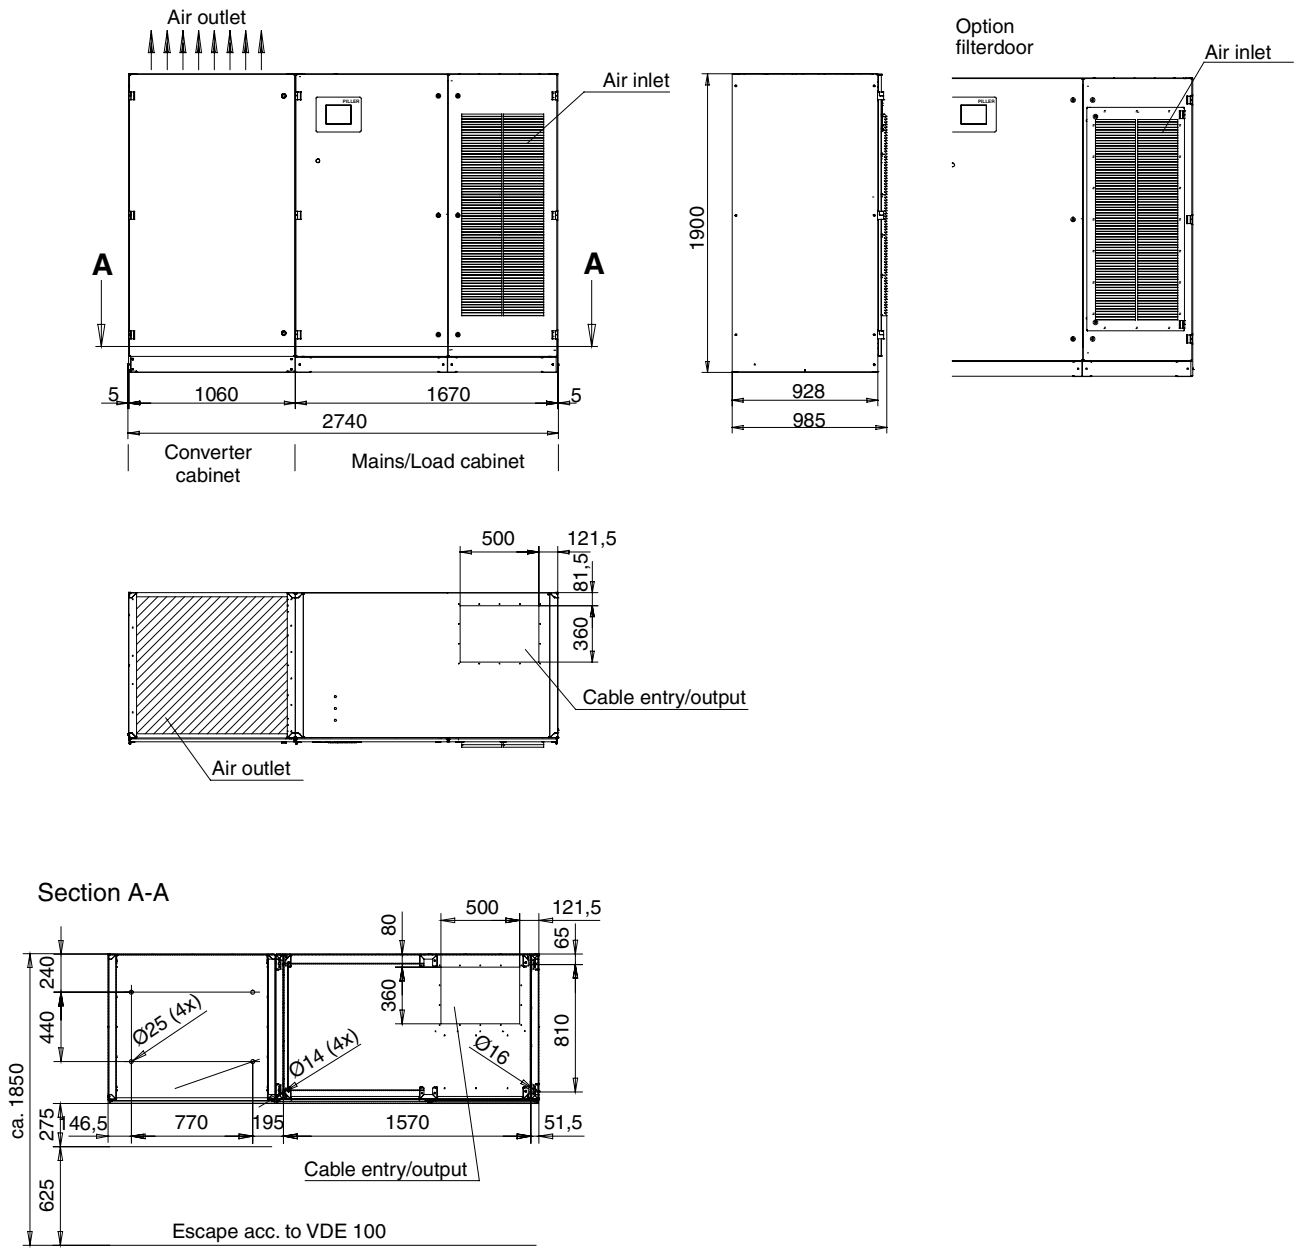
Dimensions UB-SF 180 – UB-SF 250
